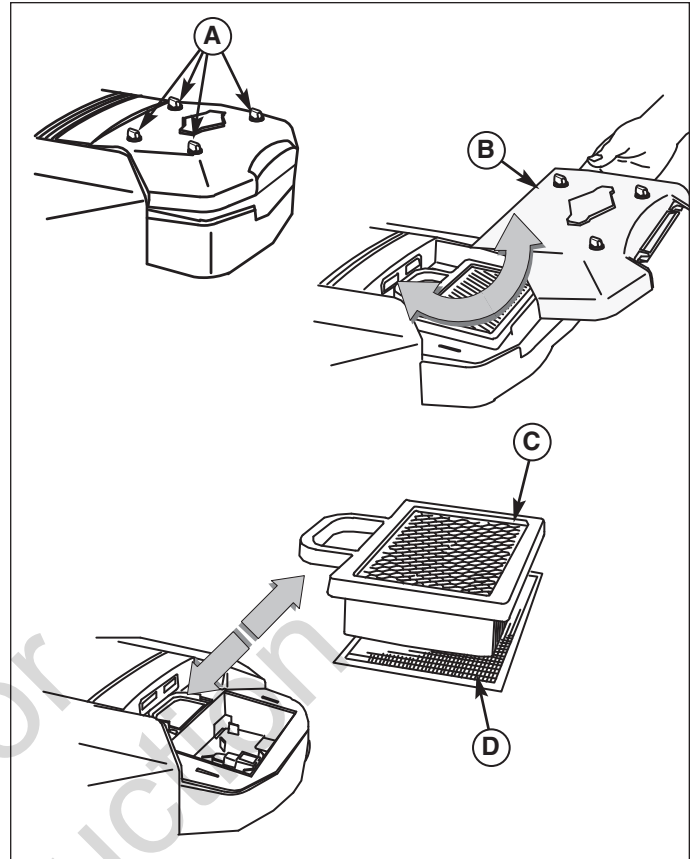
Air Filter Assembly - Briggs & Stratton Twin Cylinder Models
